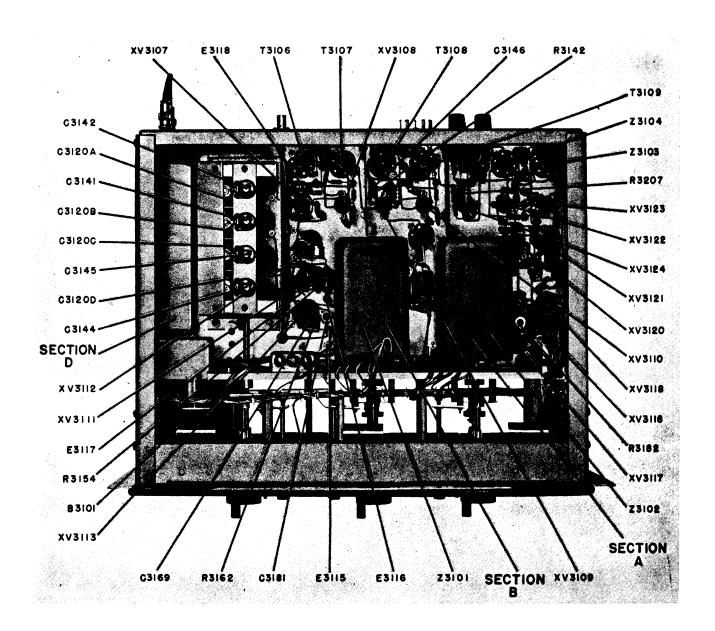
R-F Oscillator O-243/FRT-24, Case Removed, Bottom View, Location of Parts
